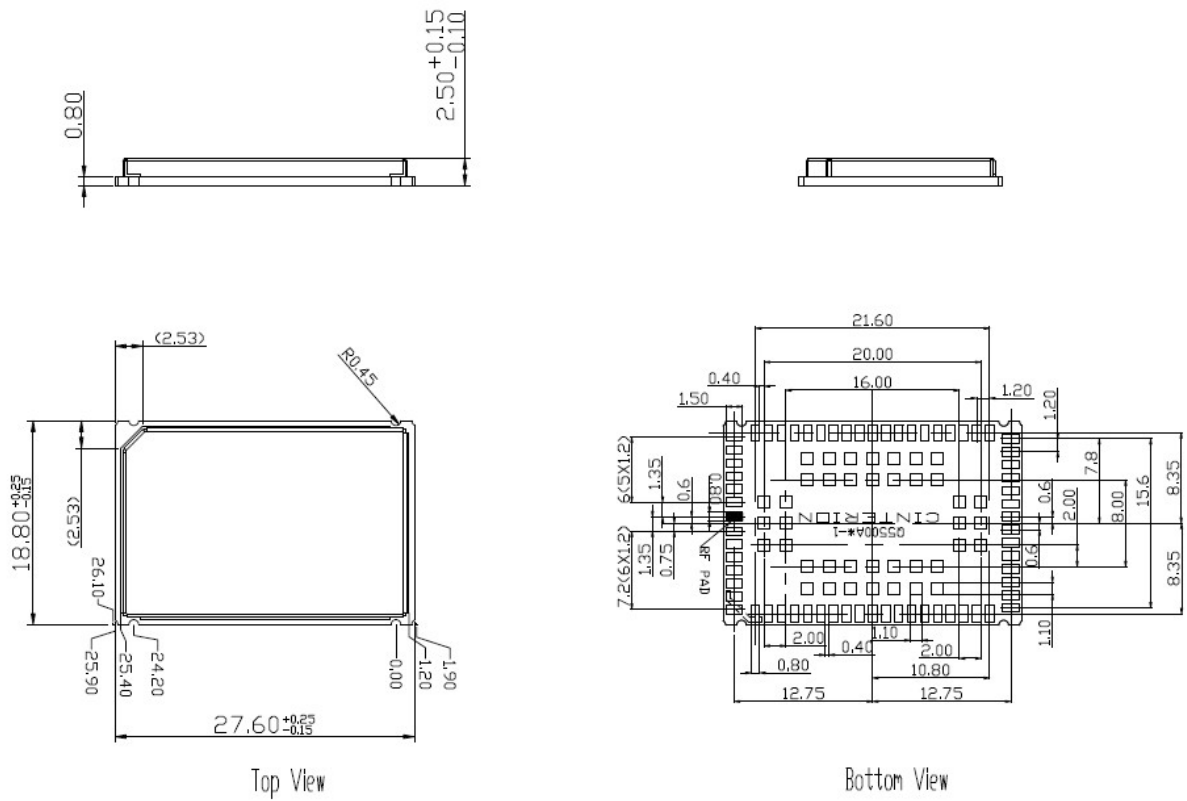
Dimensions of Cinterion® ENS22-E (all dimensions in mm)
